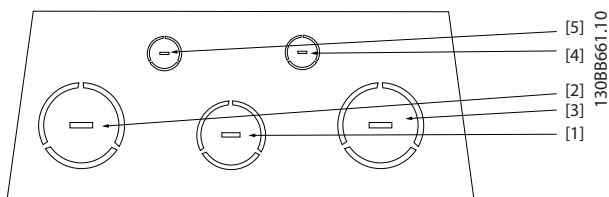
Enclosure Size B2, IP55 Threaded Gland Holes
